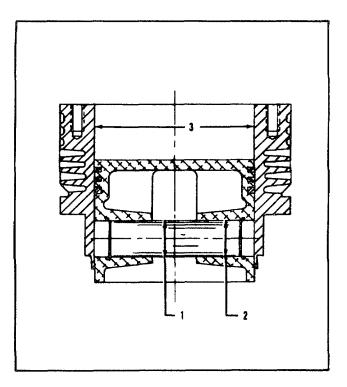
First Stage Cylinder, Piston and Pin Assy
